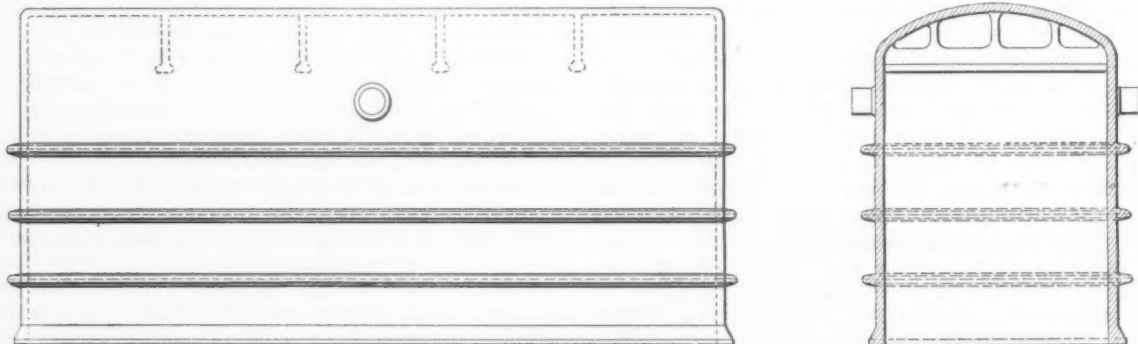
Side Elevation and Cross Section of the New Form of Steel Annealing Box Made by the Union Steel Casting Company, Pittsburgh, Pa.
